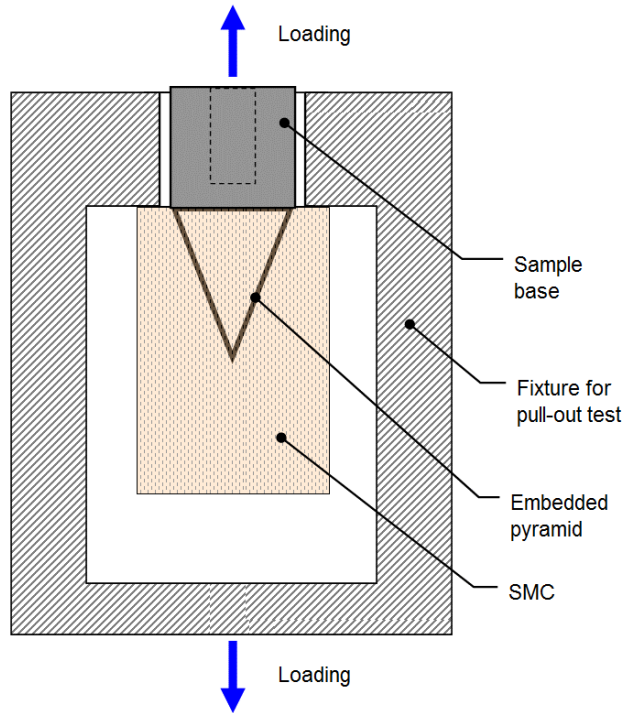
scheme of the testing fixture for pullout test and sample assembly
